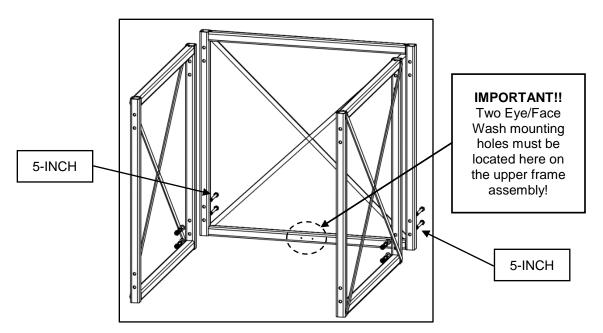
Installing Lower Bolts (5-inch) Temporarily to Form Upper Frame Assembly
